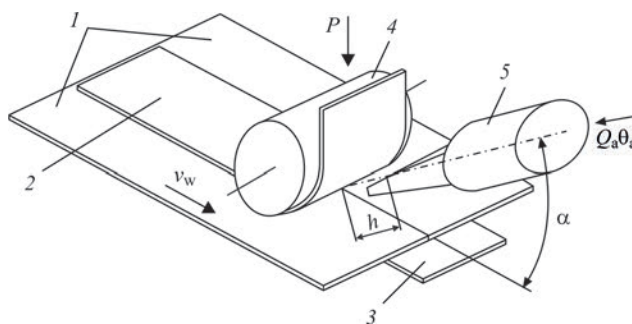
Scheme of butt welding of artificial leather with a tape using hot air: 1 — laminated fabrics being welded; 2 — connecting tape from laminated fabric; 3 — backing tape from laminated fabric; 4 — press-down roller; 5 — hot air heater with nozzle
